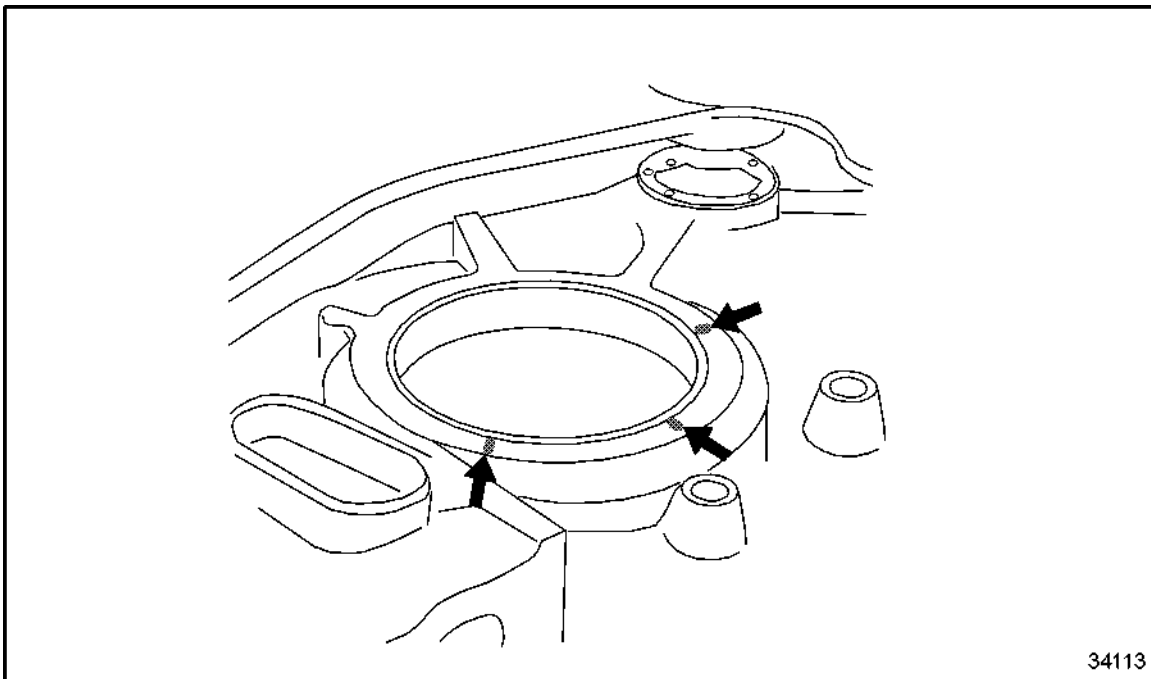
Marking Outboard Bearing in Gear Case for Oil Bores
